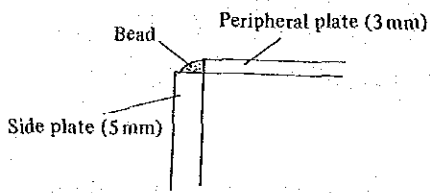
Welded part of the gear housing (Present one)
